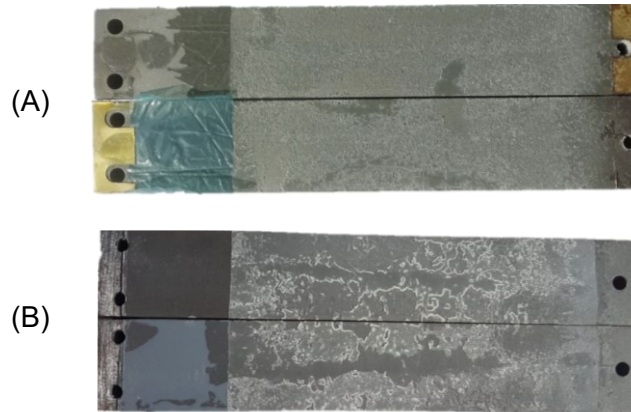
Fracture surfaces of (A) virgin V2 and (B) nano-reinforced N4 DCB specimens.
